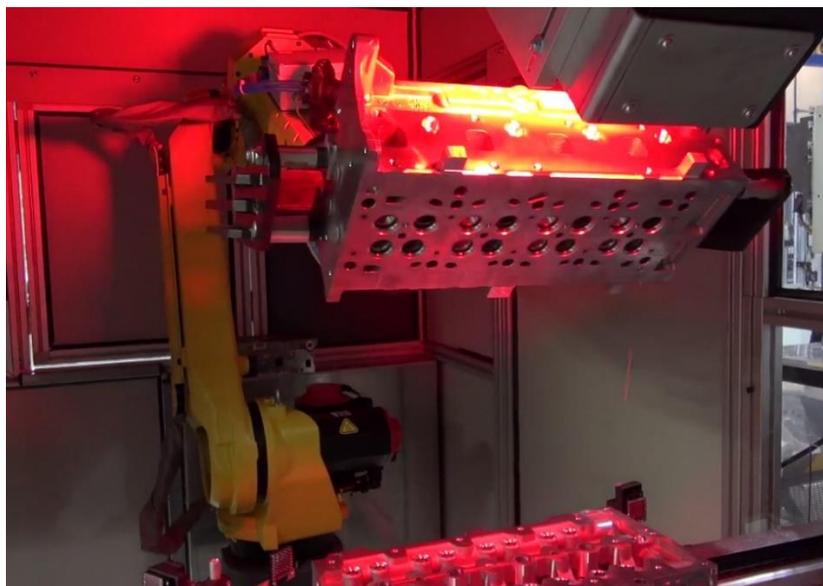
Final control on the machining line for the Diesel engine's lower cylinder head: The vision system
